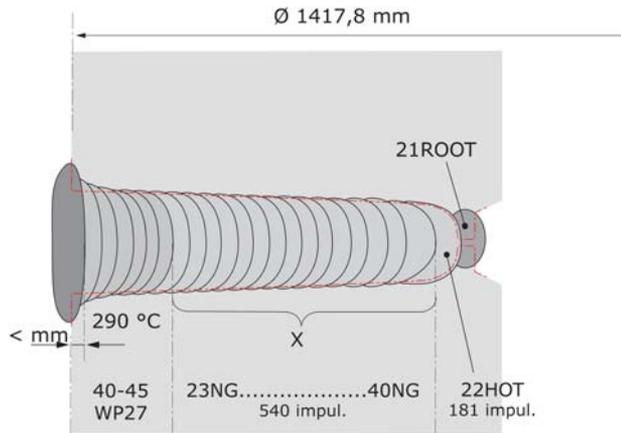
Disposition of welding passes. 21ROOT = root pass 180° (x 2); 22HOT = hot pass 180° (x 2); 23NG – 39NG = filler passes with narrow gap torches 540° (x 2); 40WP27 – 45WP27 = filler passes with conventional TIG torches 540° (x 2).
